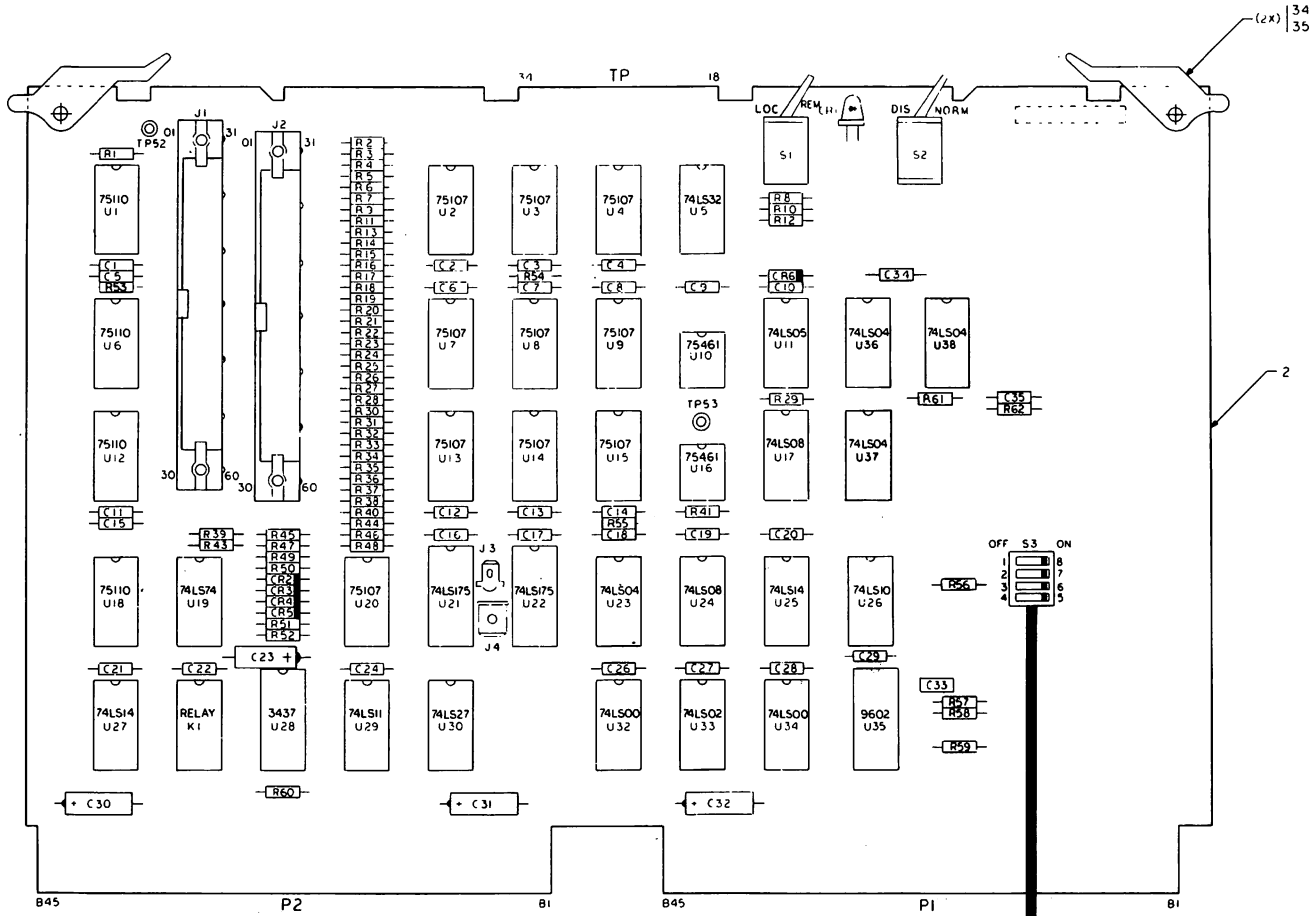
I/O CKT BOARD (SHEET 6 OF 9)
